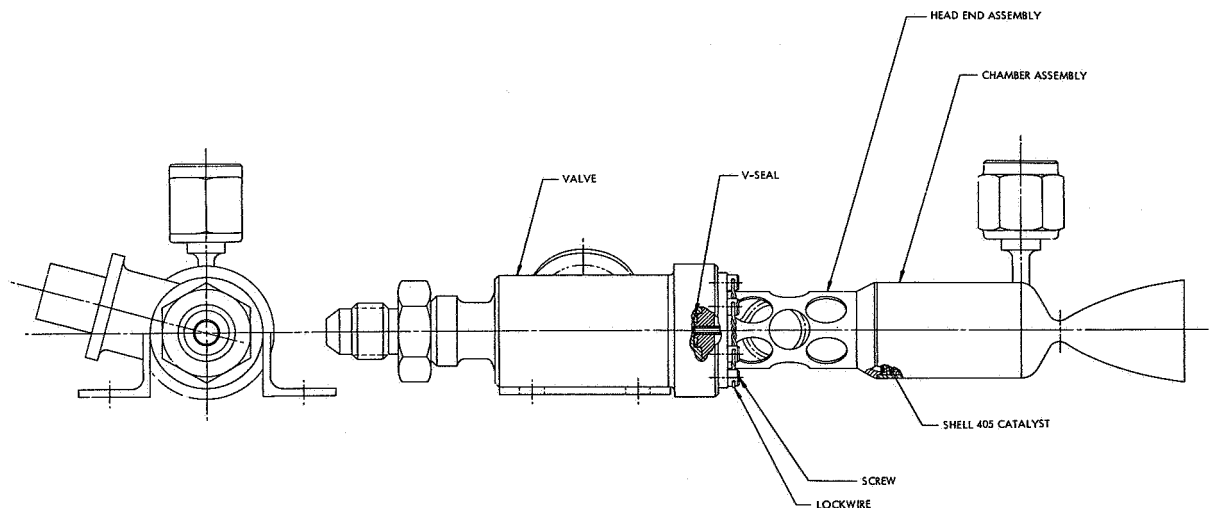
Engineering Drawing of Proposed TRW Thrust Chamber Assembly
